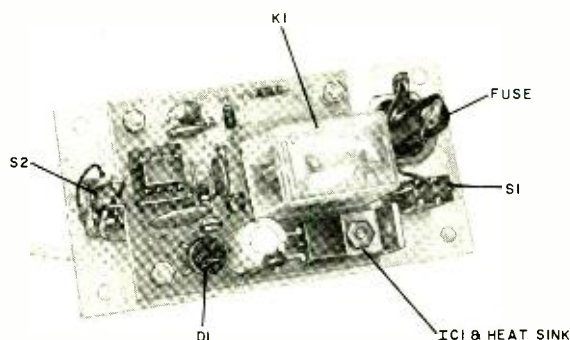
Photo of prototype printed circuit board removed from enclosure.
